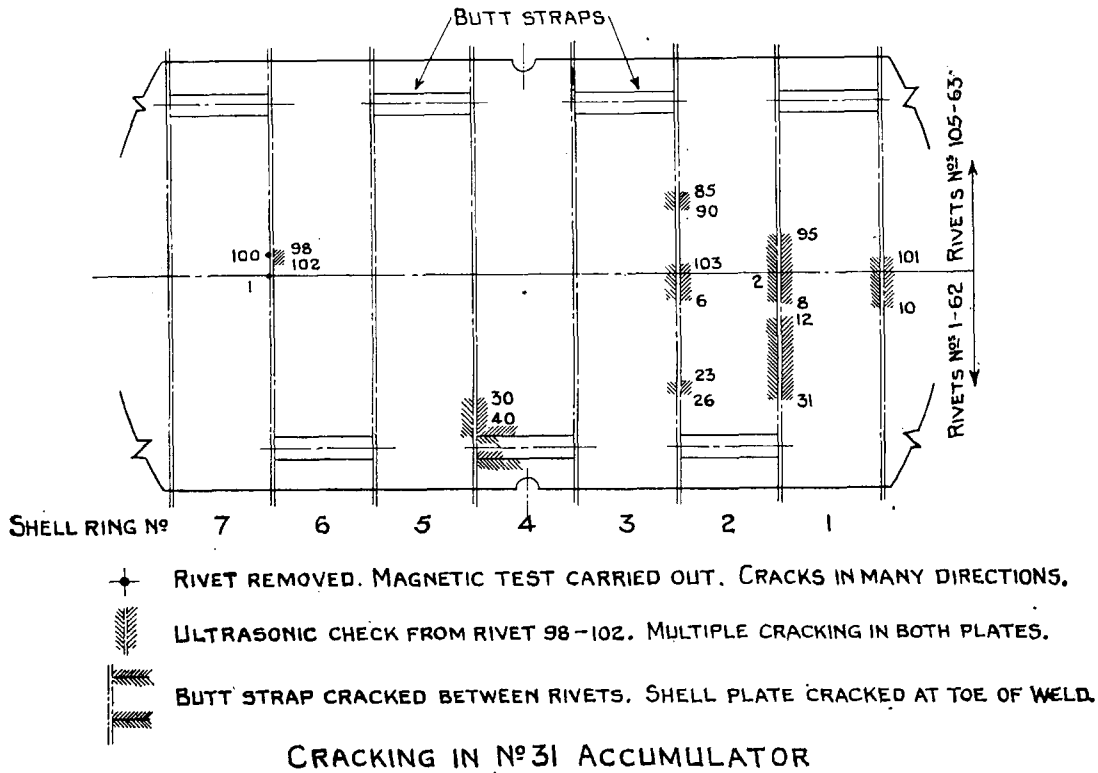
DEVELOPED PLAN OF SECOND ACCUMULATOR SHOWING NON-DESTRUCTIVE TESTS APPLIED
